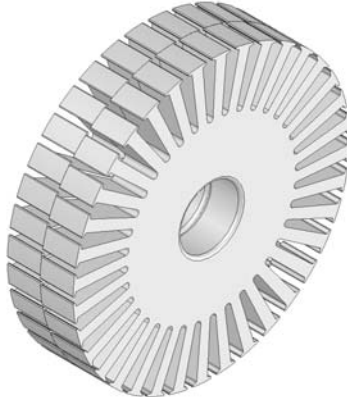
An example of step skewing for the inner rotor winding used in the FE simulations.
